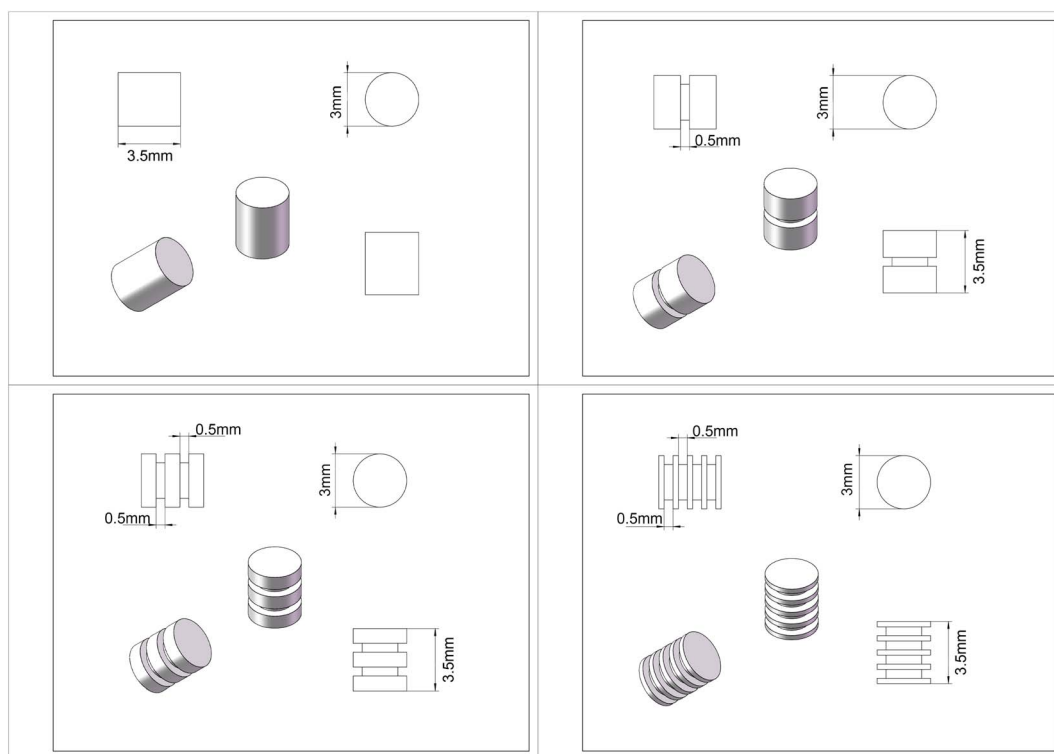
Schematic design of HP magnesium rods with dimensions.
